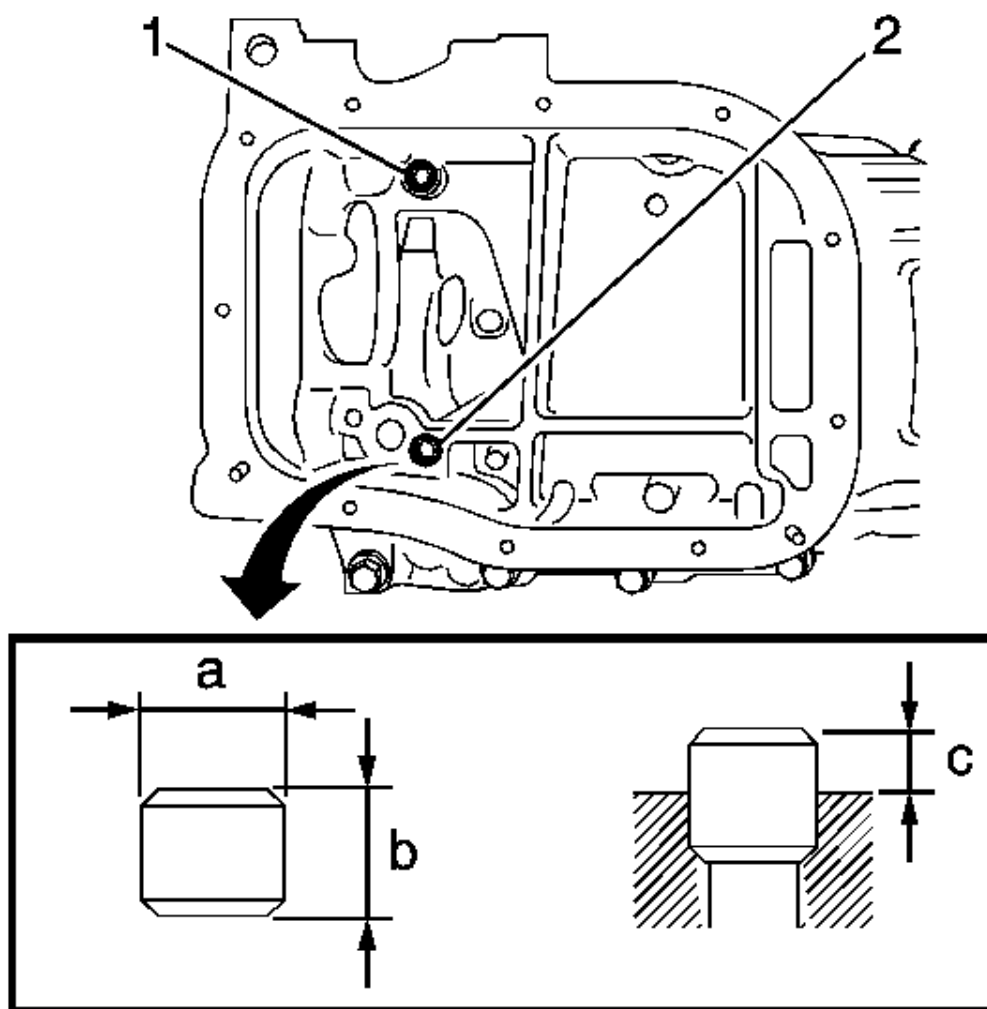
View Of Ring Pins-To-Crankcase Installation
